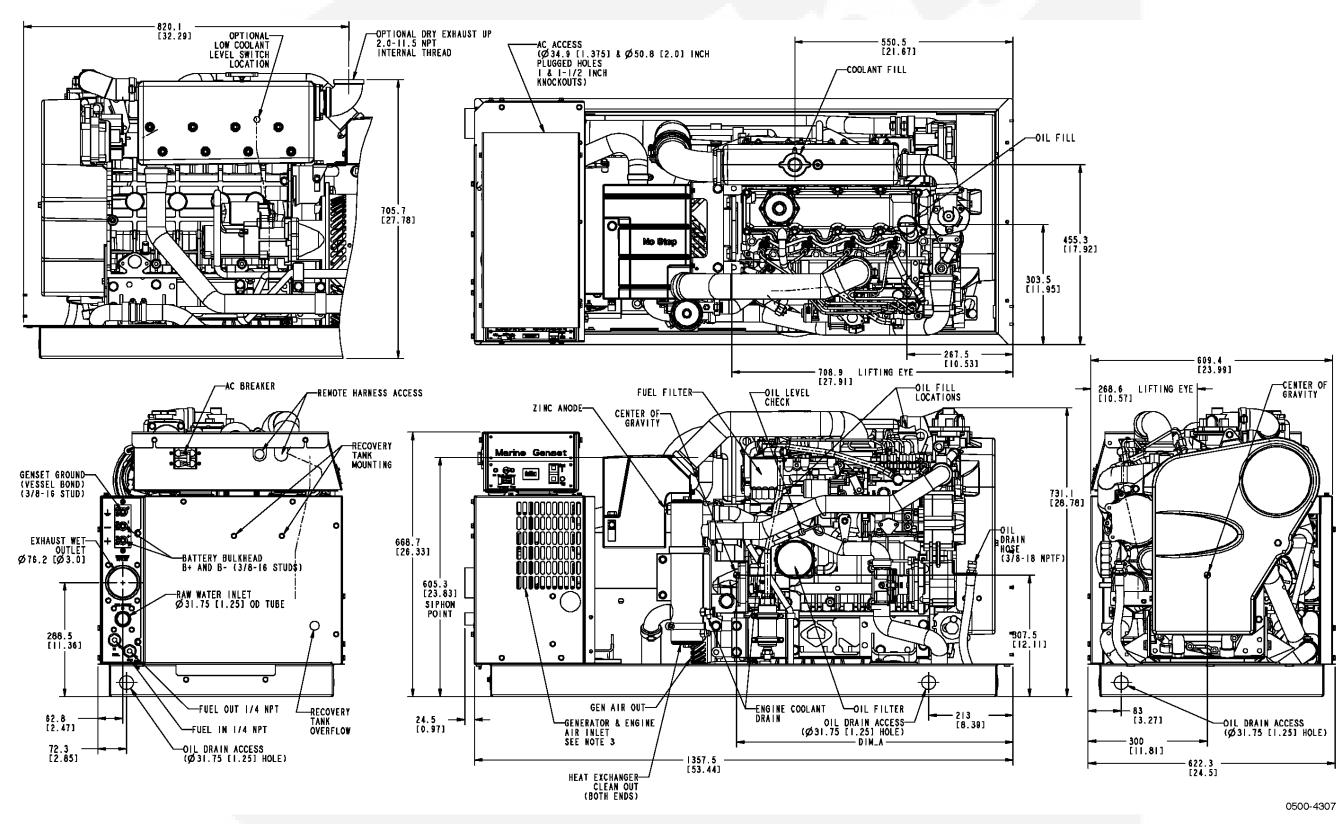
MDKBT AND MDKBU OUTLINE DRAWING (SHEET 2)
